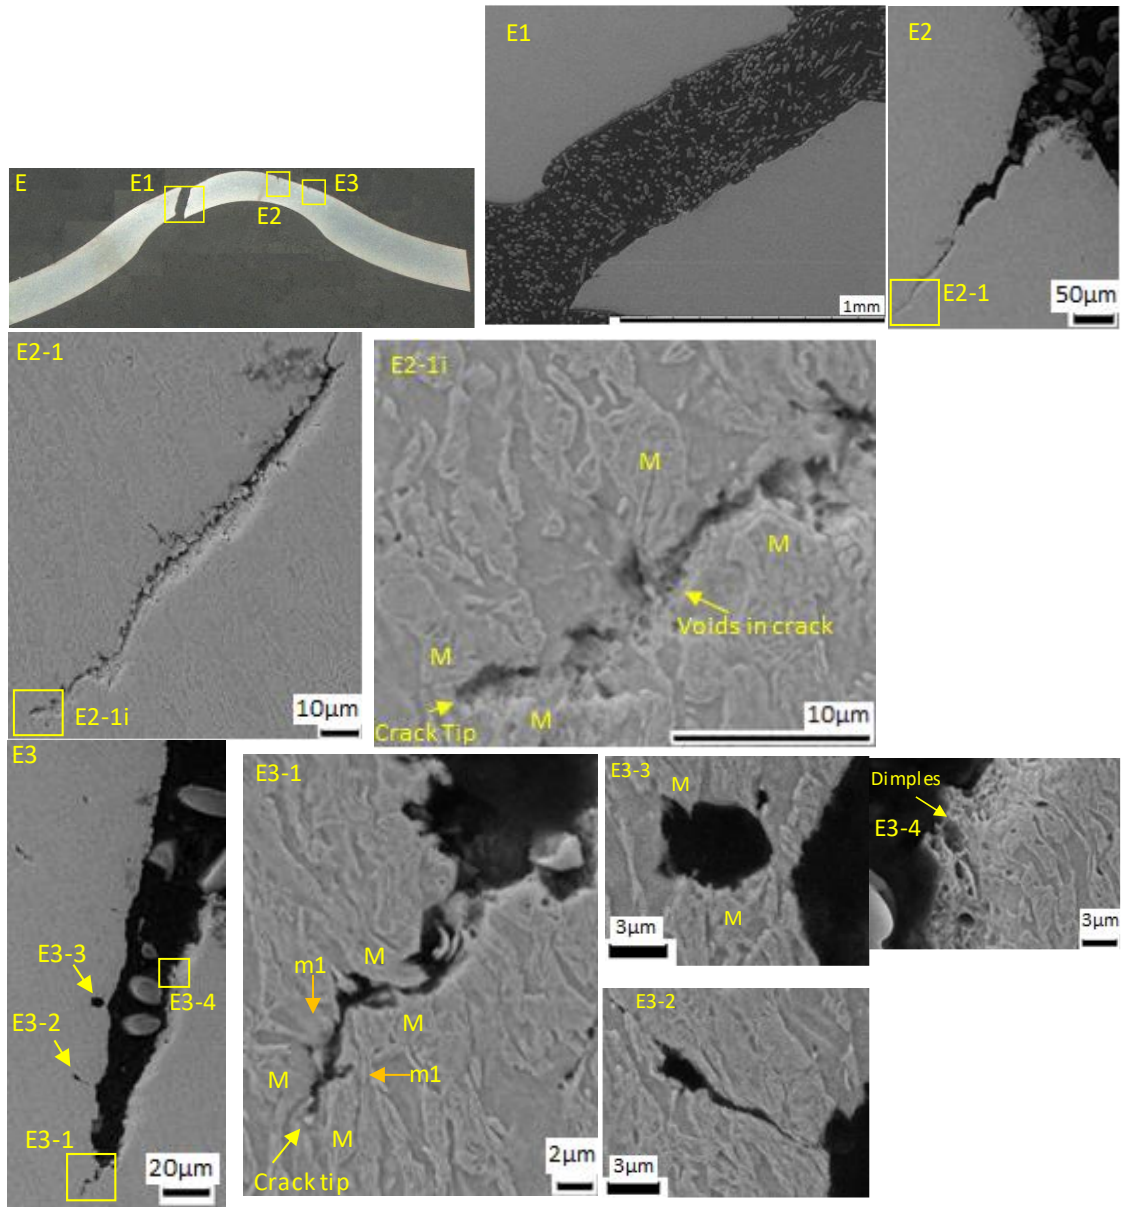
Damage in punch test specimen 340°C. Two large cracks are observed at the surface in (E2) and (E3).
